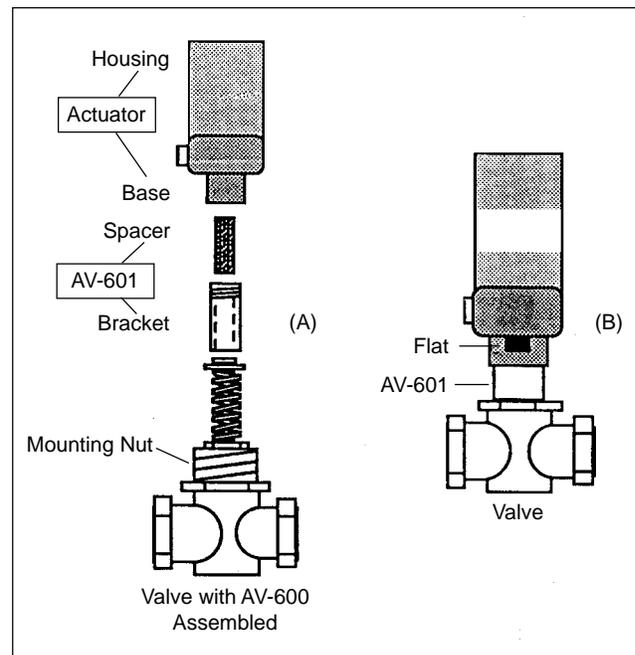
Assembly of Actuator to AV-601 and Valve with AV-600
